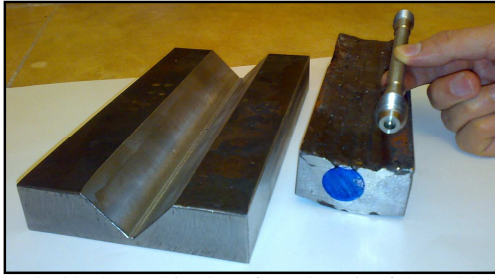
The blanks machined out from the axis of the weld material zone of the weldment
